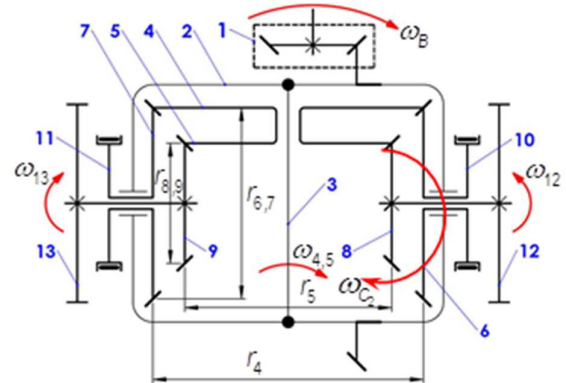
Kinematic diagram of the steering and linear drive mechanism with double differential
